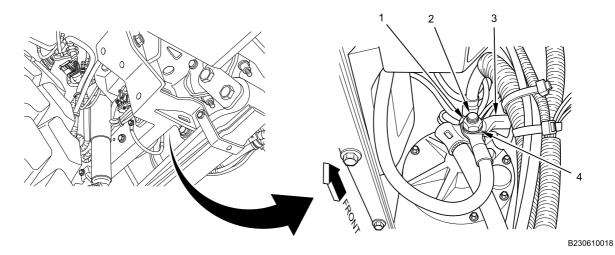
Starter Motor-to-Frame Ground Jumper Cable.
